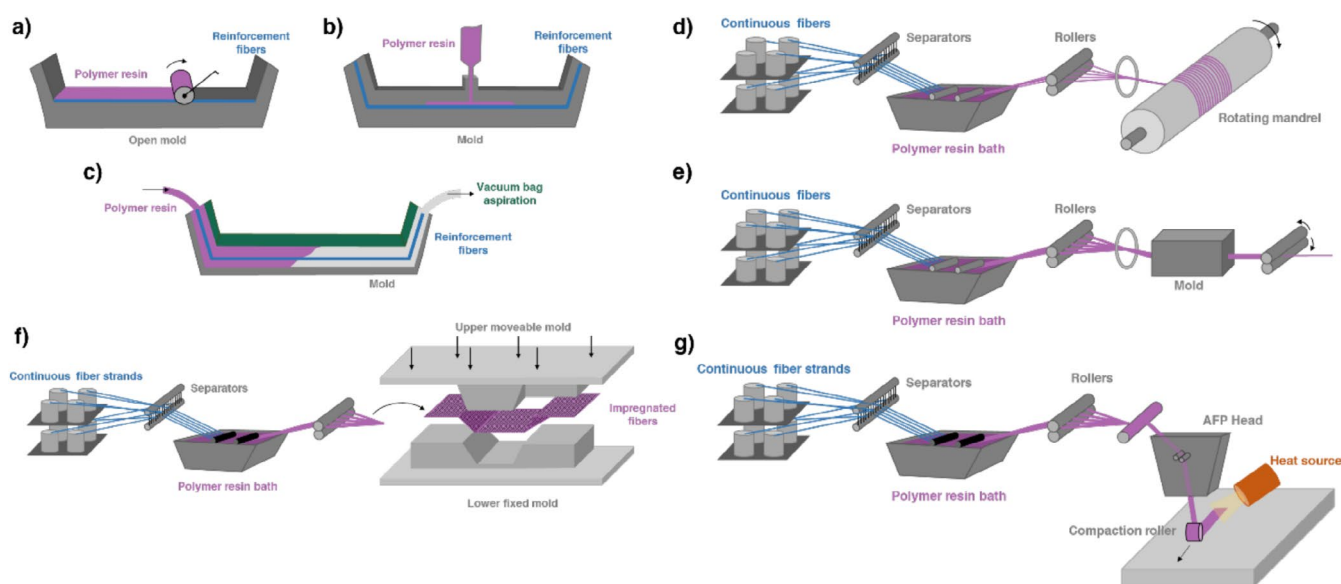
| Schematic representation of the manufacturing techniques of GFRPs: (a) hand lay-up, (b) resin transfer molding (RTM), (c) vacuum-assisted resin transfer molding (VARTM), (d) filament winding, (e) pultrusion, (f) compression molding, (g) automated fiber placement (AFP).
